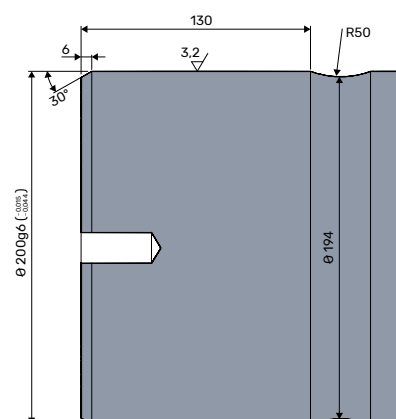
Dimensions of the recommended customer shaft design for type 5B.
